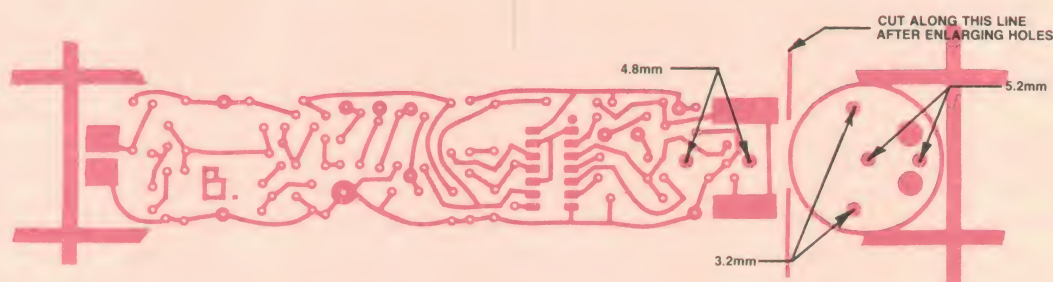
enlarge the holes in the PCB as shown, then separate the main section from the rear cover.
